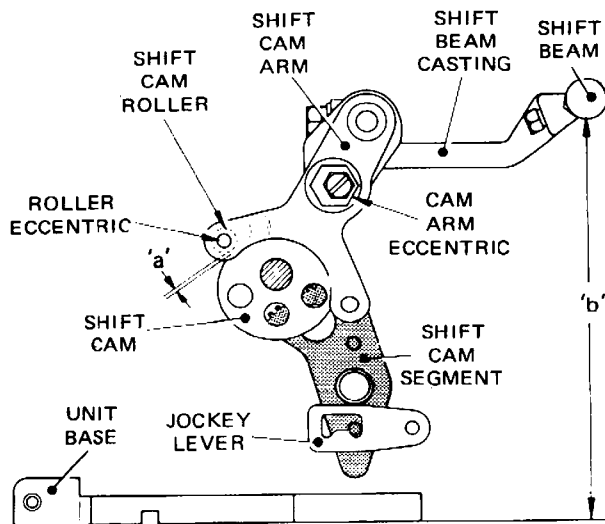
SHIFT CAM MECHANISM (LEFT-HAND SIDE VIEW)
